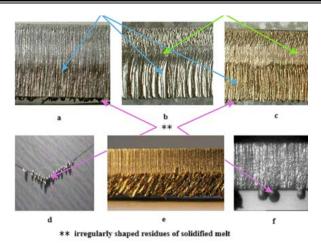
Laser cutting defects: a – stainless steel with a thickness of 5 mm, b – stainless steel with a thickness of 16 mm, c – titanium 30 mm; d – electrical steel 0.5 mm; e – stainless steel, oxidised at the bottom of the cut due to air mixing 5 mm, f – 1 mm stainless steel
